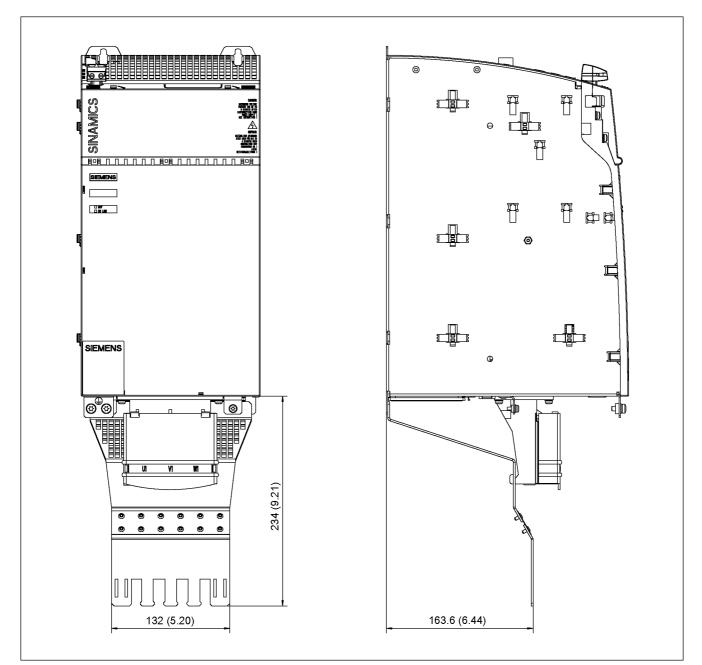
Dimension drawing of shielded terminal plate on a 200 mm module with internal air cooling
